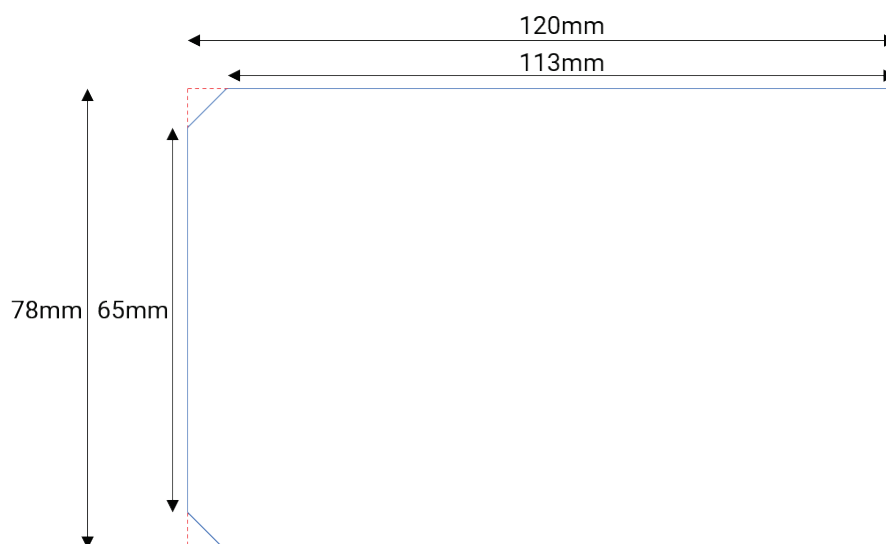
6-well & 24-well plate formats require chamfered corners on one side and must not exceed 122 mm length and 80 mm width.
